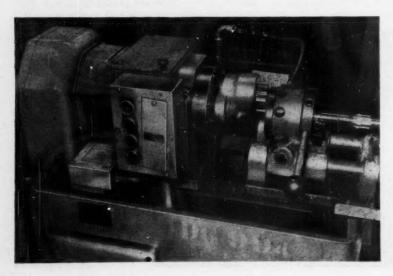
At the Final Operation on the Mainshaft, Apart from Inspection, the ½-in. Diameter Thread on One End is Cut on this Planetary Thread-milling. Machine
